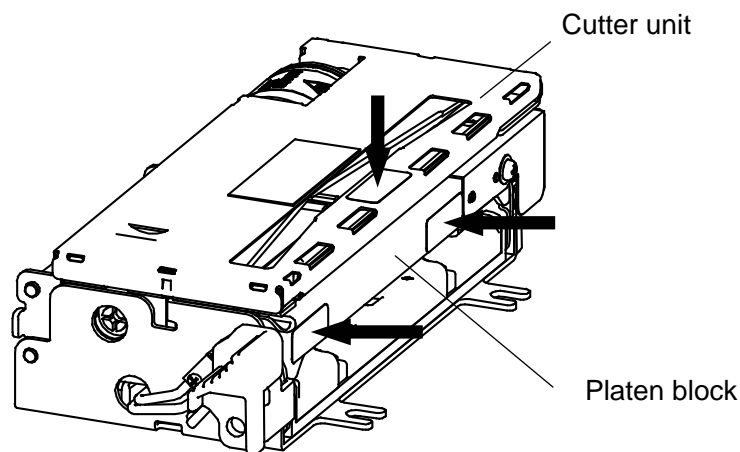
How to Close the Cutter Unit and the Platen Block
